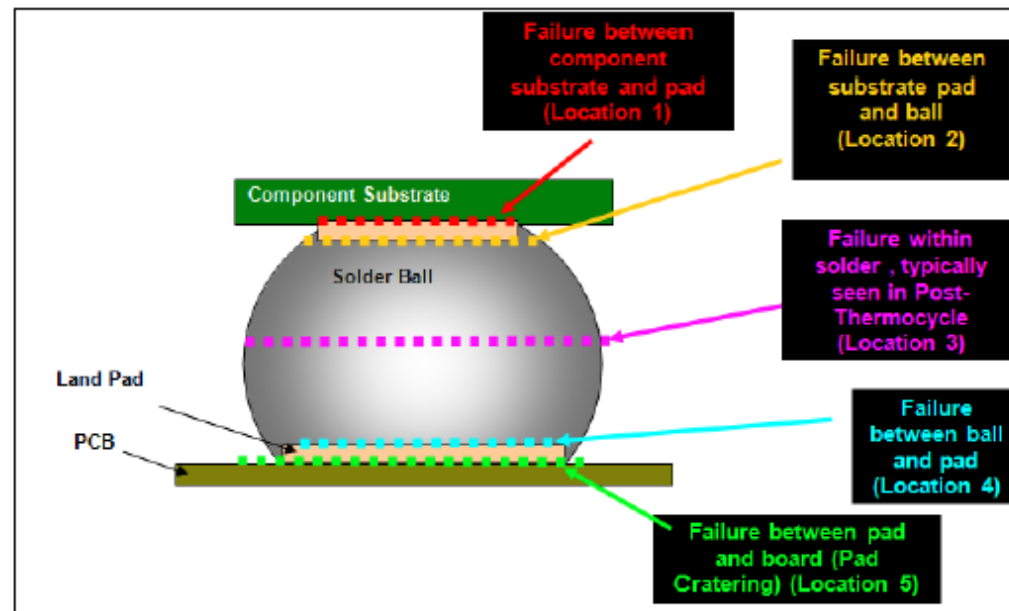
Various Possible Failure Modes for a BGA Solder Joint
